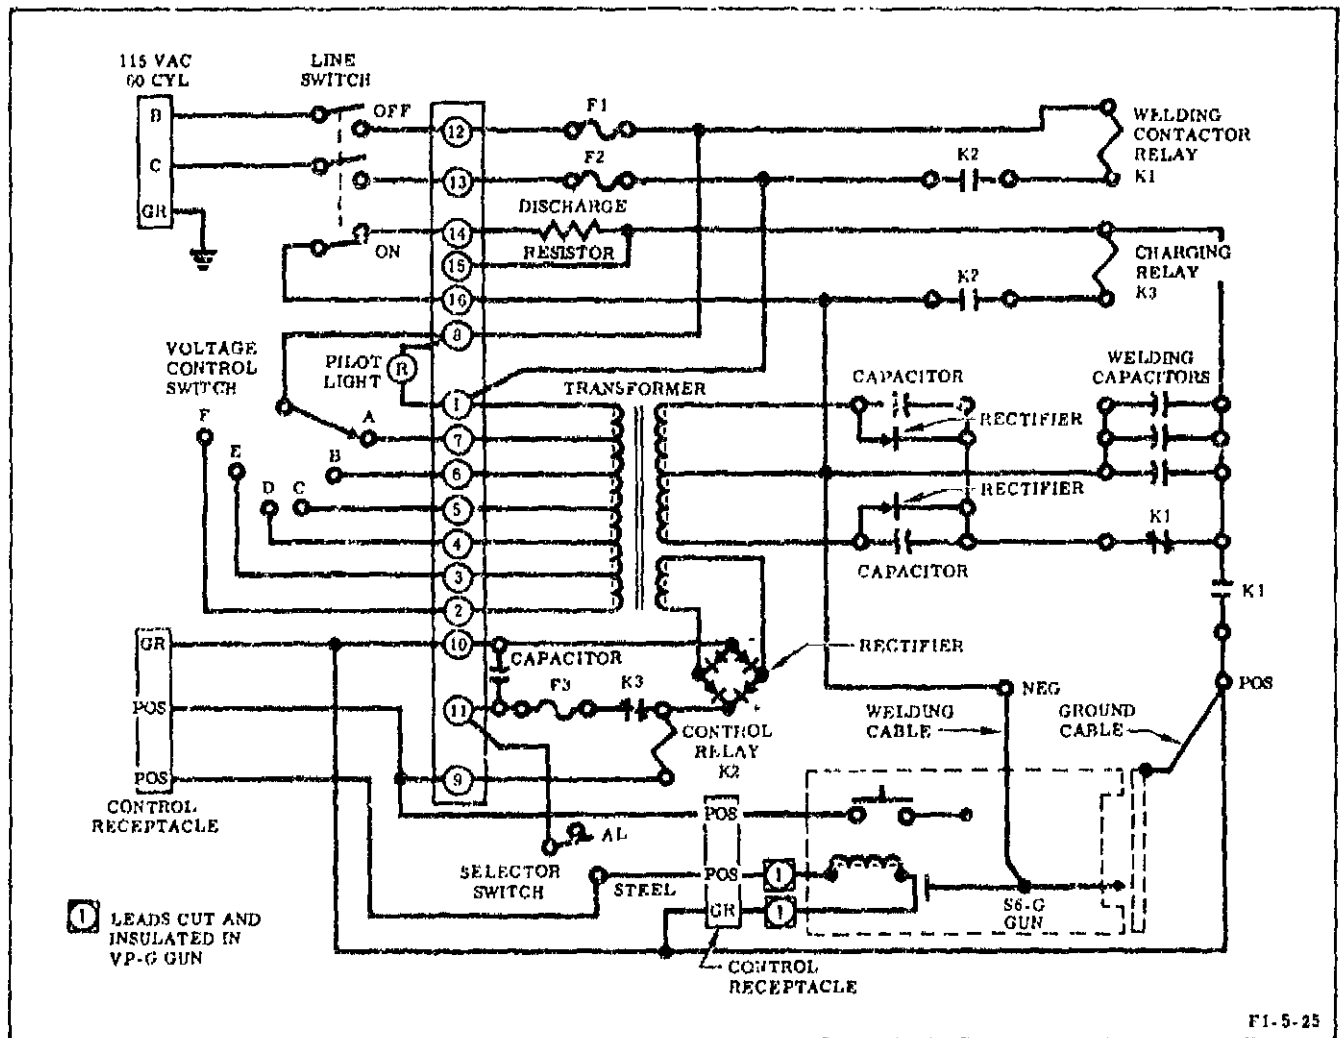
Components Welding Set 9026570 Electrical Schematic
